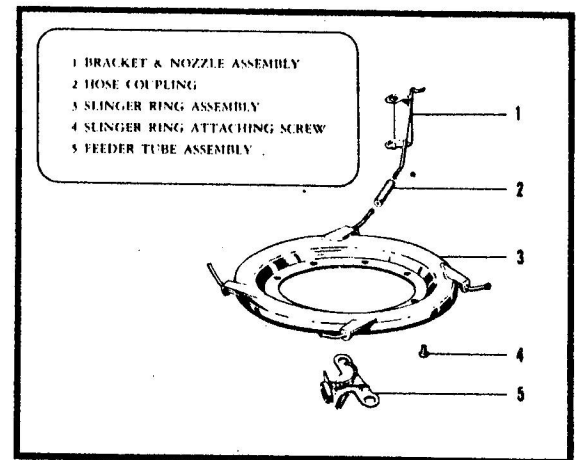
De-icing Device Assembly for Models 24E50 and 24E60
